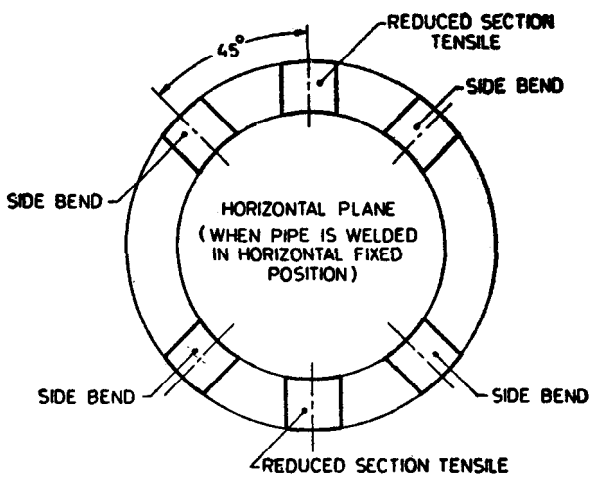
ORDER OF REMOVAL OF TEST SPECIMENS FROM WELDED PIPE
